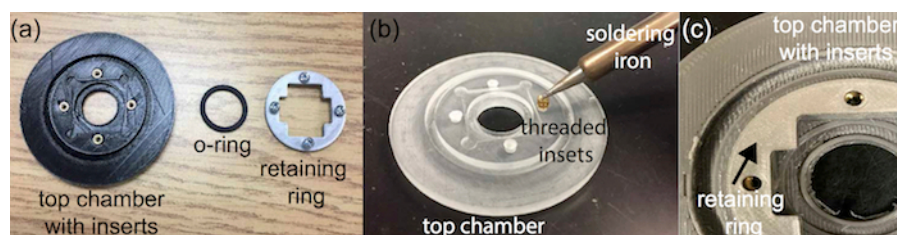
The assembling of the top chamber. (a) This panel shows a disassembled 4-pixel top chamber. (b) This panel shows the application of threaded inserts in the top chamber using a soldering iron. (c) This panel shows partially assembled top chamber components showing the alignment of the retaining ring to the top chamber (note that the O-ring and the screws are not shown for clarity). Different colors of PLA plastic were used for the printing of various parts; these have no effect on the performance of the chamber. [Please click here to view a larger version of this figure.](#)
